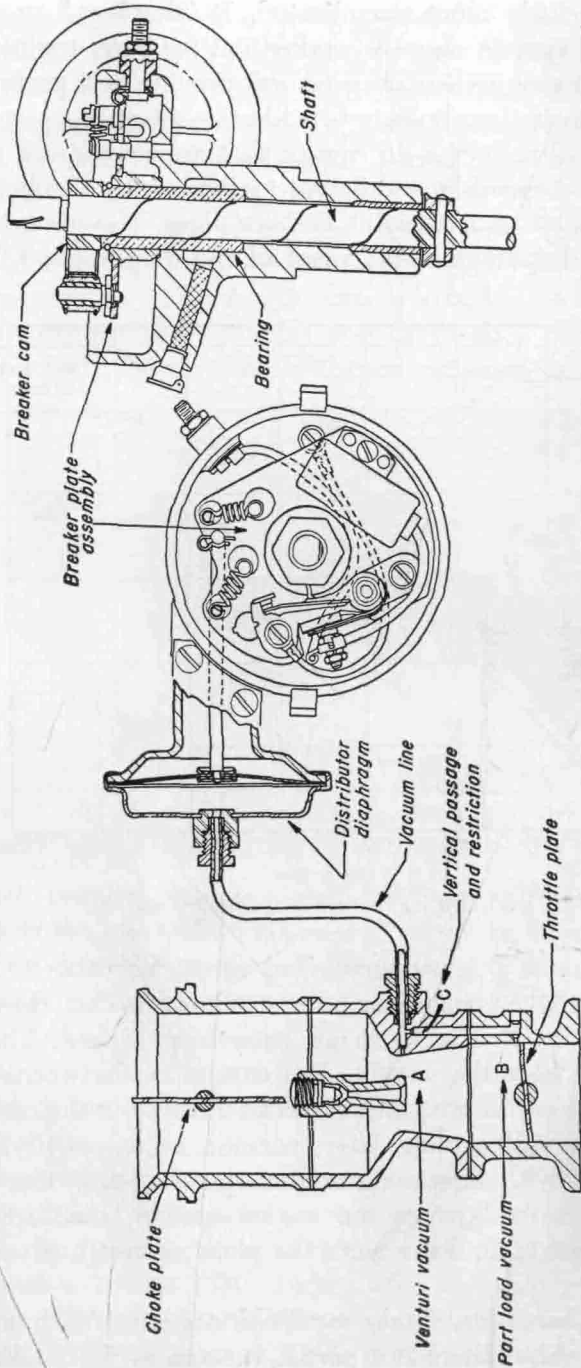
Top and sectional views of a full-vacuum-control distributor showing vacuum connections to carburetor with which it is used. (Ford Motor Company)
